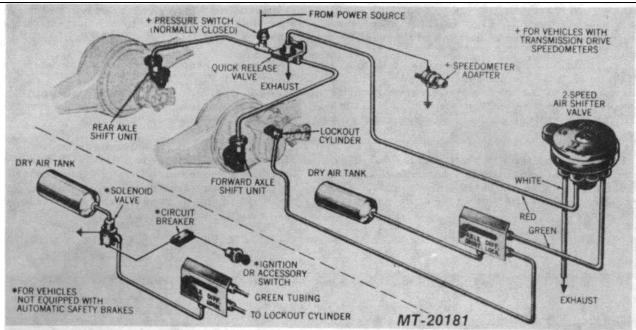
Two-Speed Tandem Axle Straight-Air Shift System.
